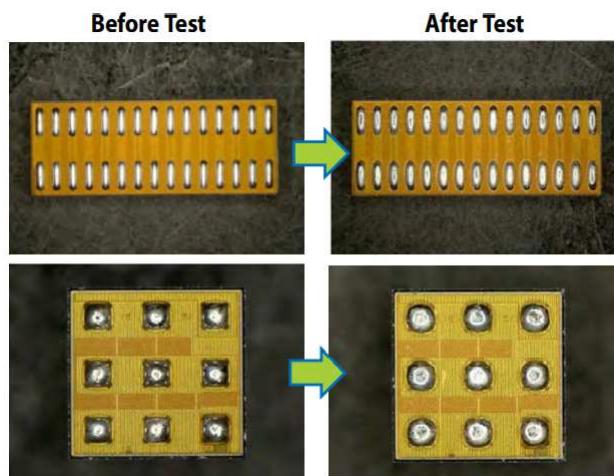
Solder pads for EPC2206 and EPC2214 before and after solderability test. Note that solder paste has been incorporated, leaving a smooth and uniform finish absent of visual defects.
